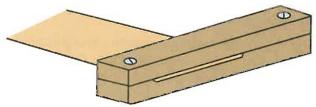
Place veneer in a clamping jig before trimming it with a plane.
